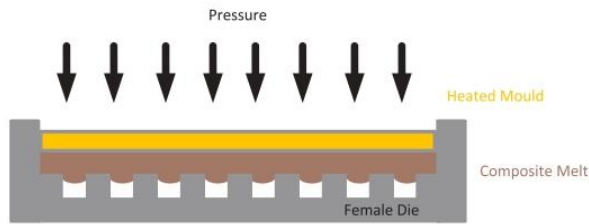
Compression moulding scheme for BPs manufacturing process.
